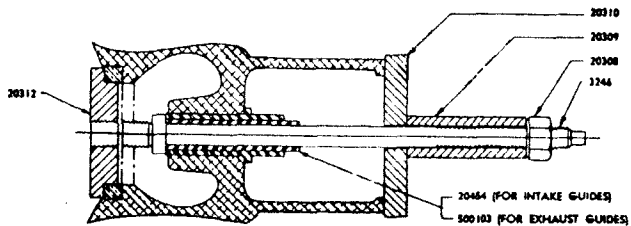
Valve Guide Puller and Inserter — Tool No. A3373
